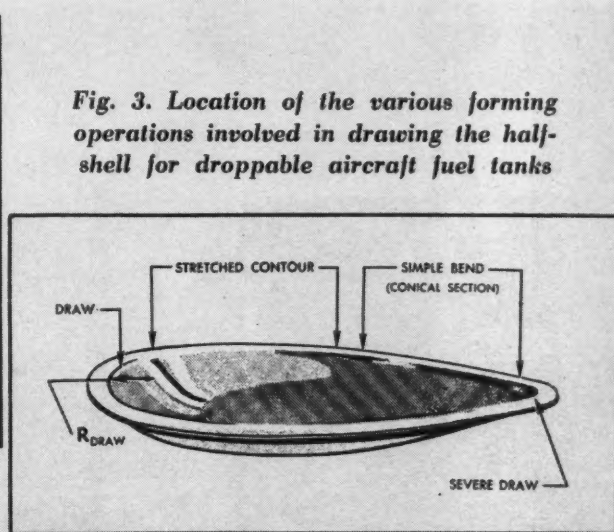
Location of the various forming operations involved in drawing the half-shell for droppable aircraft fuel tanks
